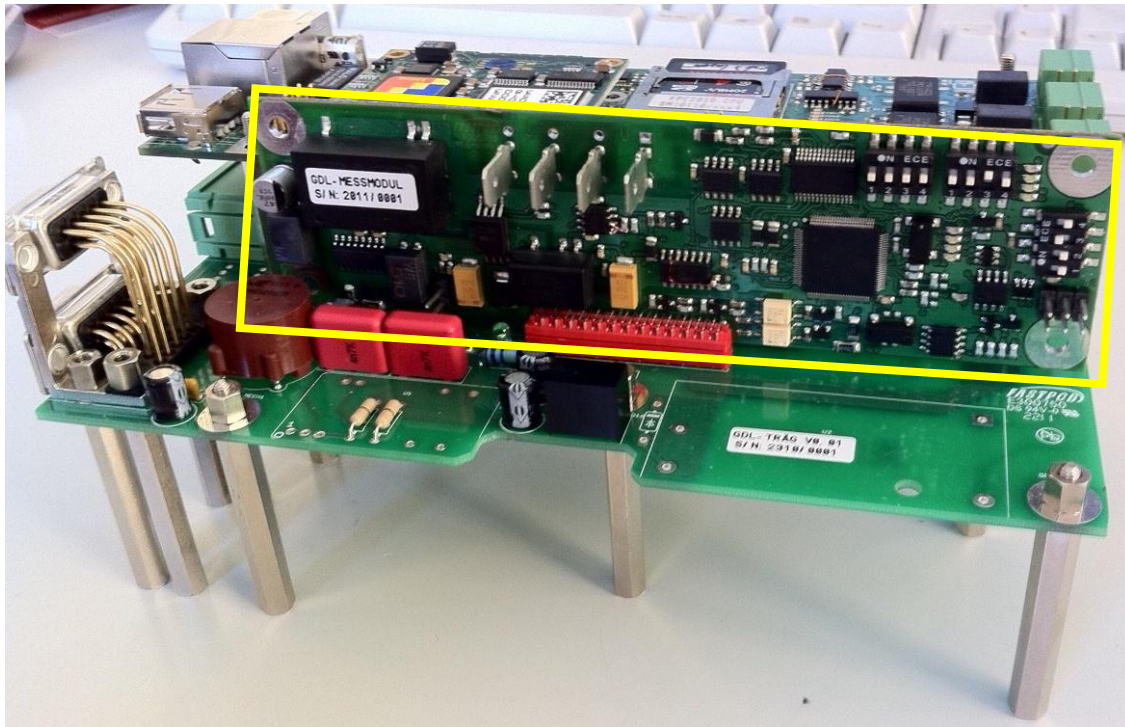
PCB of the GDL with the measurement circuit marked in yellow
